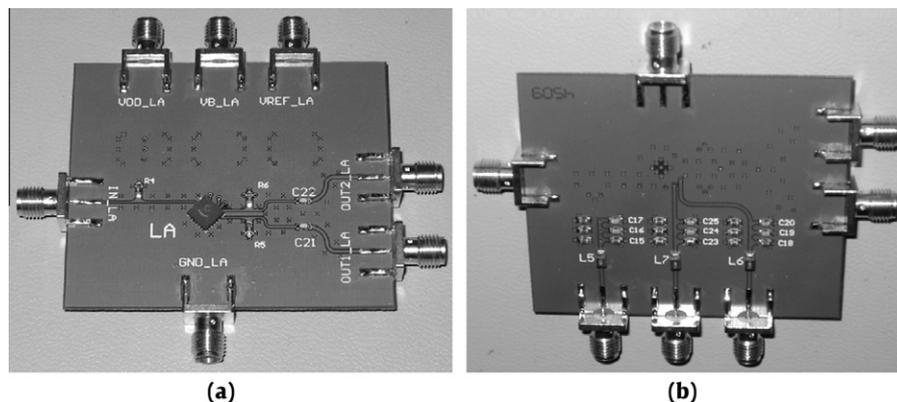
Photo of the PCB with packaged LA: (a) top and (b) bottom.
